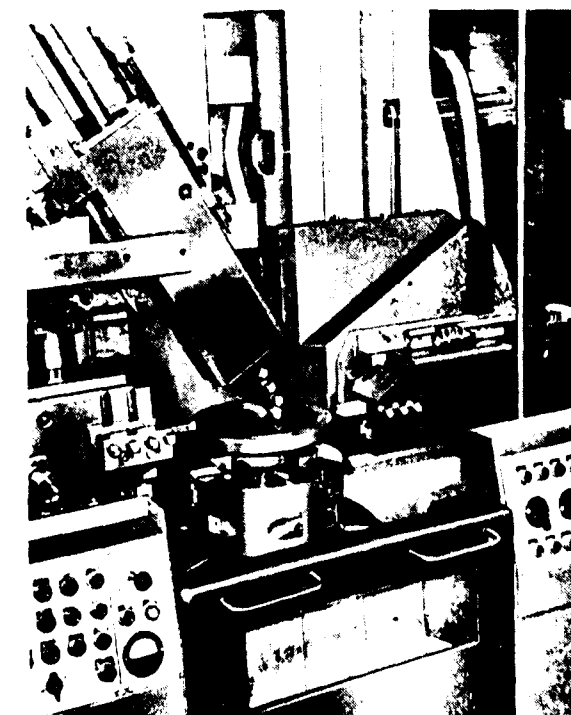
Close-up view of method of machining on a flange by means of three carriages simultaneously.
